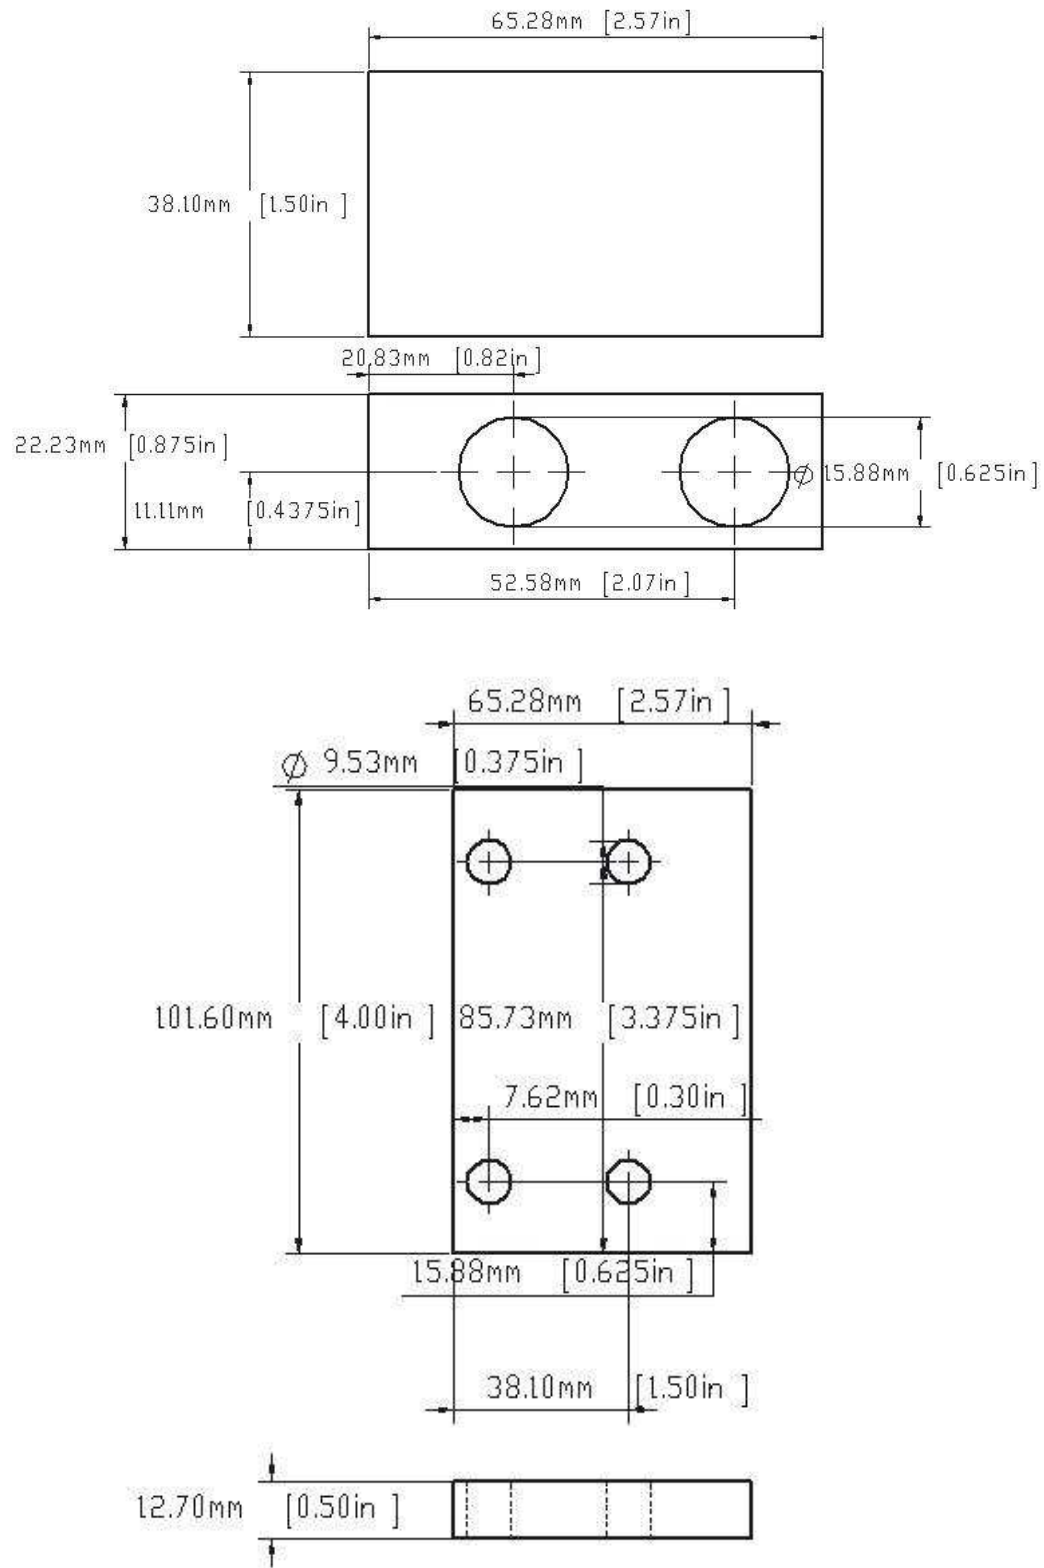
Drawings of the bottom edge-loader pieces (top, 2 required) and the bottom pieces (bottom, 2 required)
